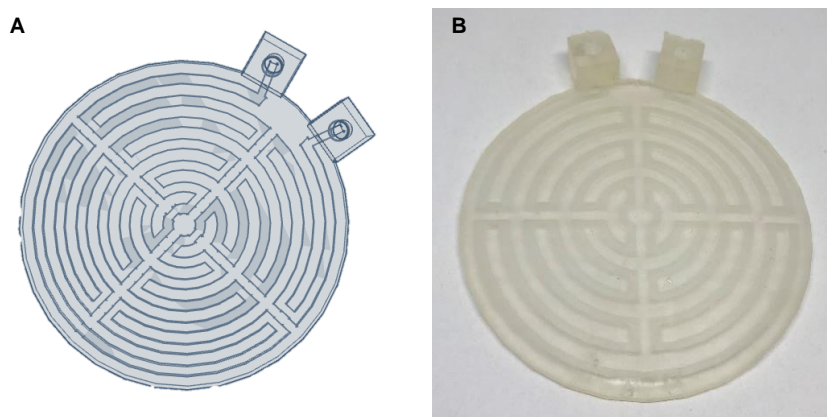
A) CAD drawing of circular hotplate reactor design 2; B) Printed circular hotplate reactor design 2.
